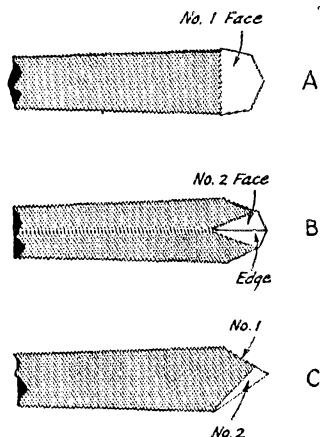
HOW THE GLASS-DRILLING TOOL IS MADE
